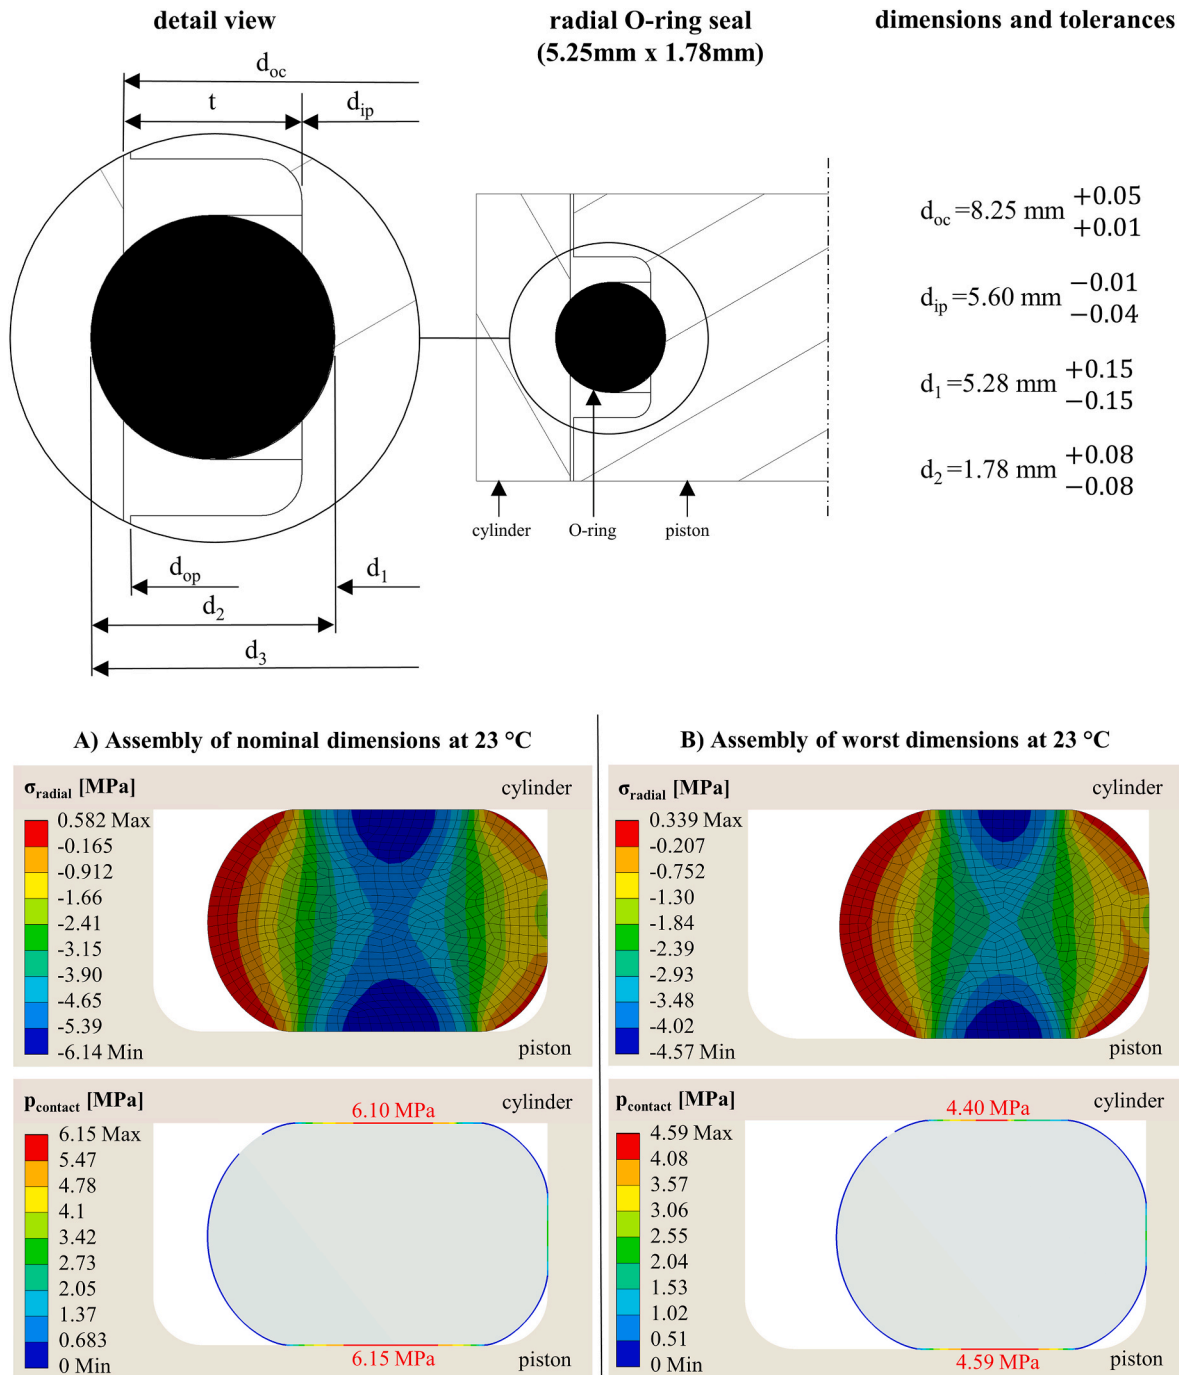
Radial O-ring seal 5.28 x1.78 with tolerances and contact pressure.
